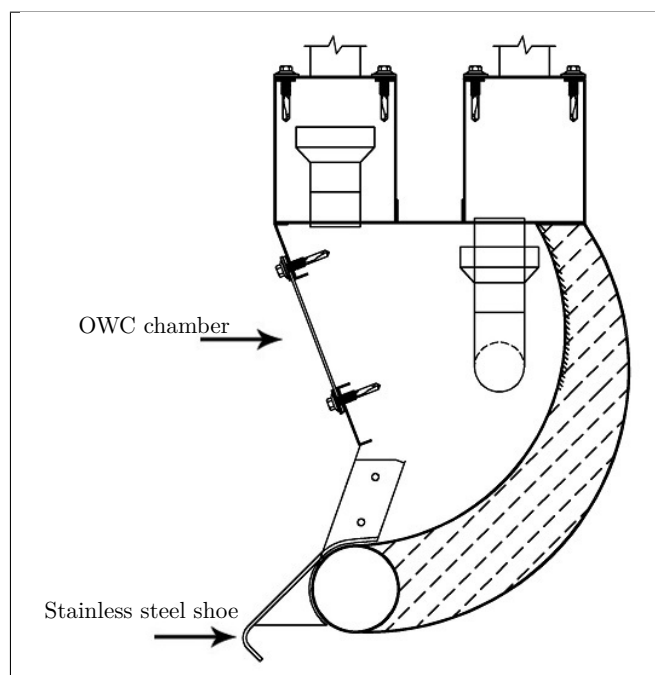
Section through a single OWC chamber of the 32-OWC model with stainless steel shoe installed.
